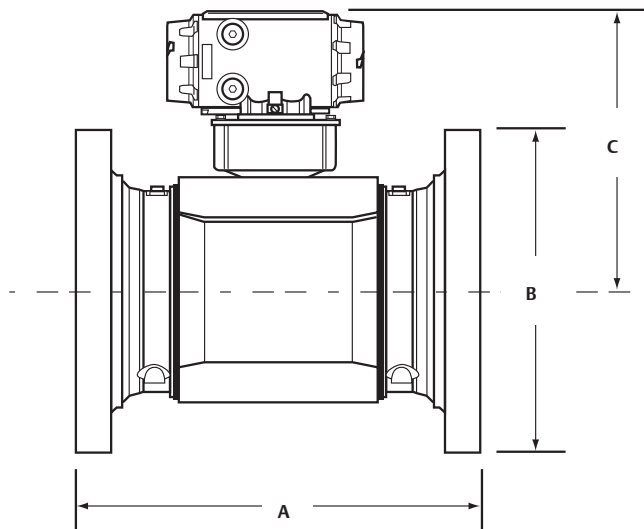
A: Meter Dimension Key (See Tables 7A and 7B)
